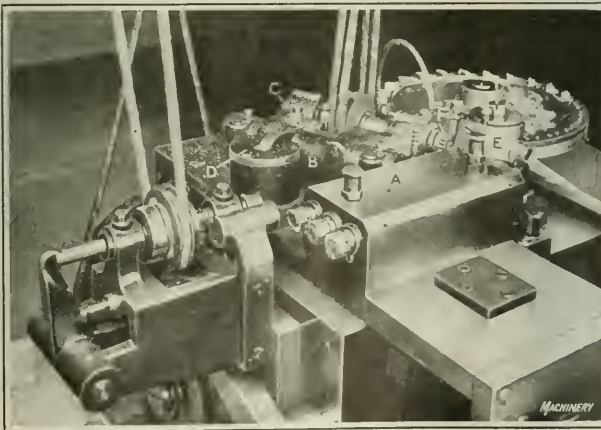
Machine for centering, drilling, and tapping the Hole for the Hair-spring Stud in a Balance Cock
